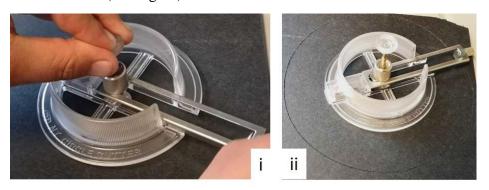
Hardboard cutting method to make a running wheel. By using a Jigsaw machine with a blade on the end-tip (i), slide it circularly with the desired diameter (in this case $\emptyset = 17$ cm) and dragging its blade, pressing the center with the fingers. Repeat one or twice until the circle is well separated from the main hardboard (ii) and then remove it.
